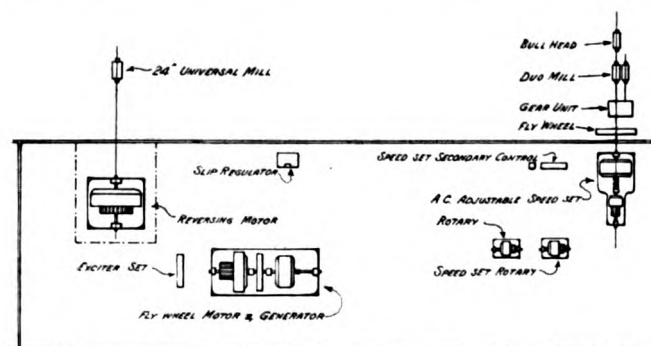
General arrangement of mill which includes a reversing roughing mill equipment at Brier Hill Steel Company.
